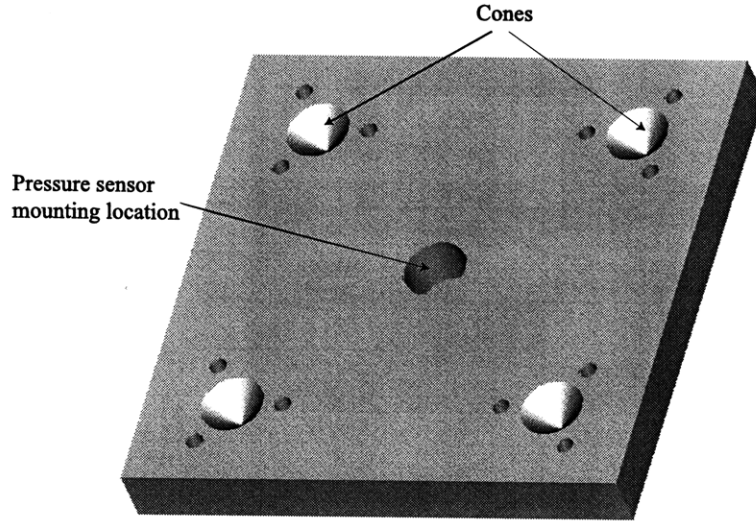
Plate on which pressure sensor is mounted to measure the pressure profile of air coming out of the grooved mandrel
